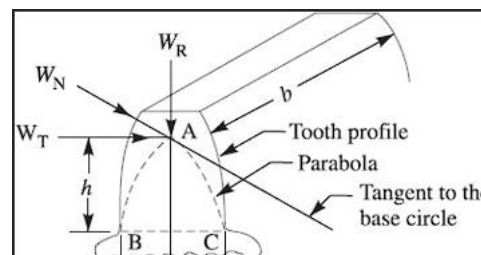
Shows the tangential tooth load direction on the gear tooth profile
